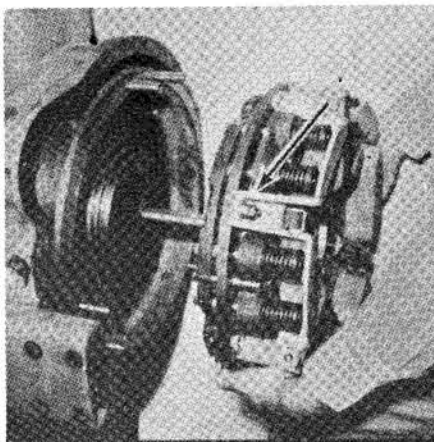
Mounting dual clutch assembly on spindle and risers; refer to Fig. 116. Cover is bolted (arrow) to center driving plate at three equally spaced points.
